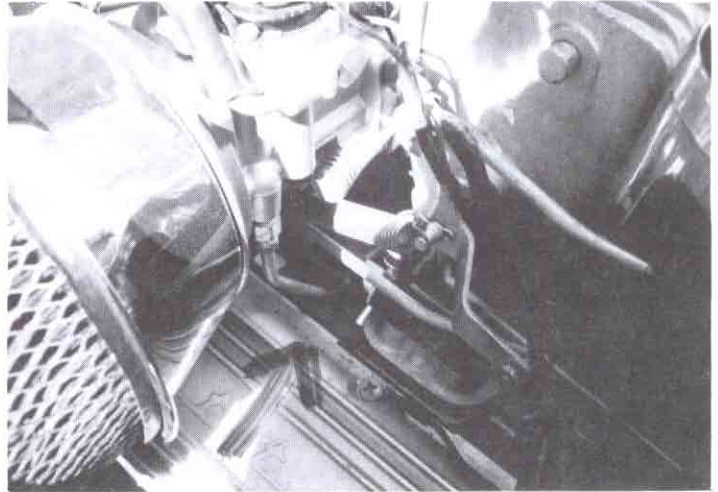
Photo C — What is hard to see in this picture is the FI unit and the 1/8-inch gasket assembled.
